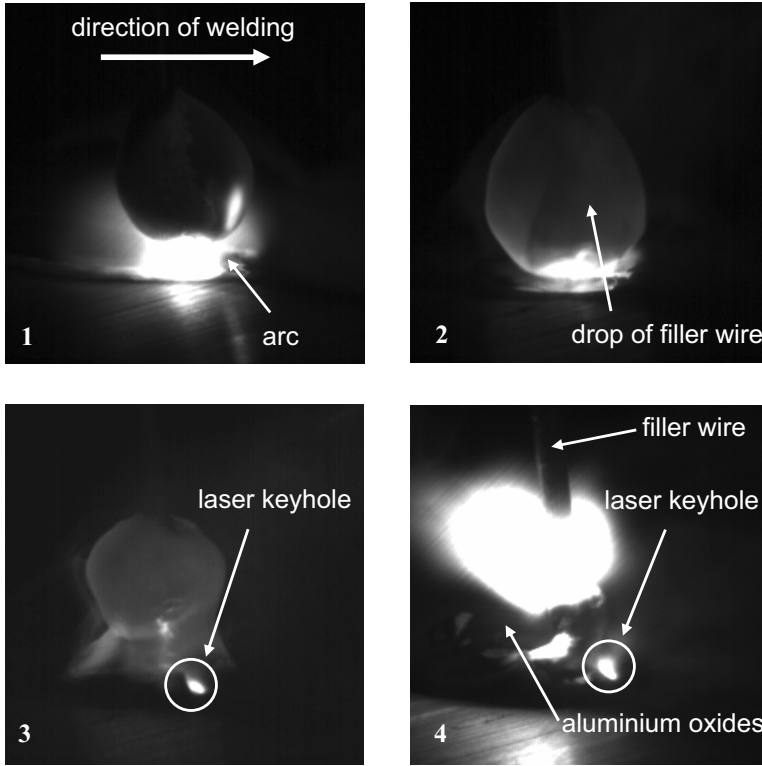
Nd:YAG laser augmented MIG welding, high-speed photograph snapshots; 1000 fps; bead on plate; EN AW-6060 (AlMgSi0.5) T66; filler Al4047 A (SG-AlSi12); $\varnothing_f = 1$ mm; $P_{Nd:YAG} = 3$ kW; torch distance $s = 22$ mm; inclination angle of optic $\varphi = 30^\circ$; torch angle $\alpha = 4^\circ$; argon flow 15 L min^{-1} ; $v_w = 3.0$ m min^{-1} ; $v_f = 8.0$ m min^{-1} ; $I_{abs} = 90\%$; $I_s = 60$ A
